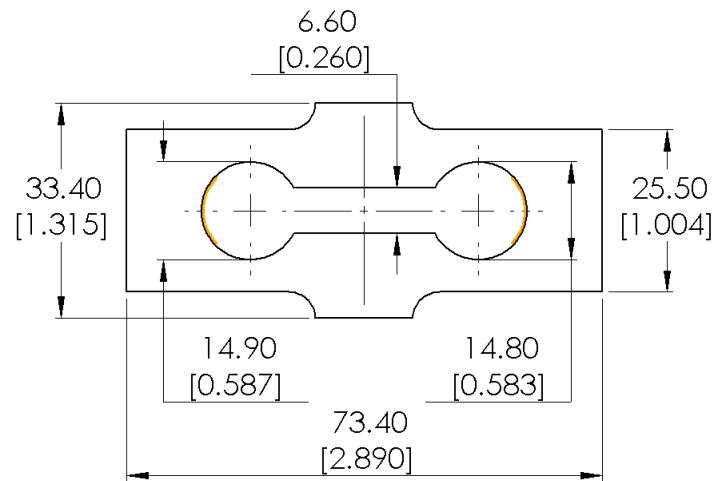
As machined dimensions of the load cell after heat treatment. The orange regions indicate where the strain gauges were applied. Dimensions are in mm [in.].
